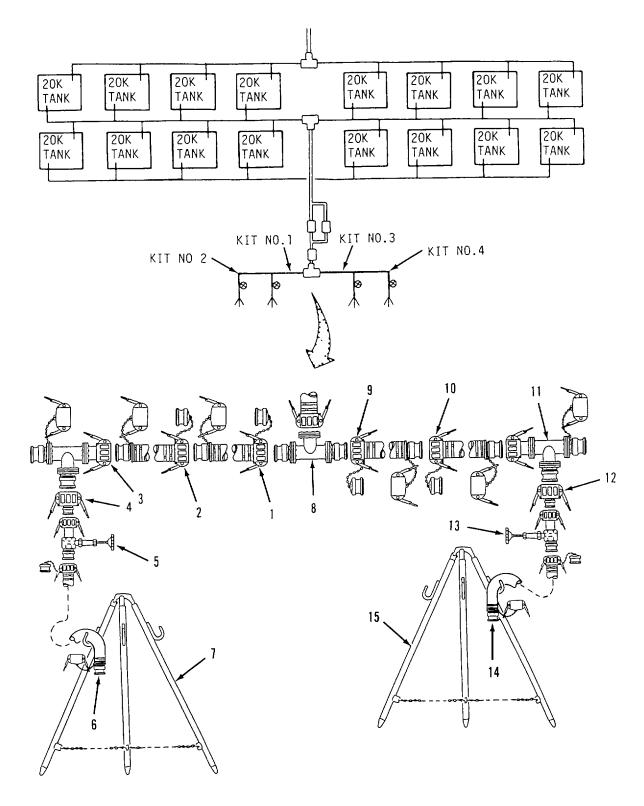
2-Inch Hose Connection Kit Disassembly.
